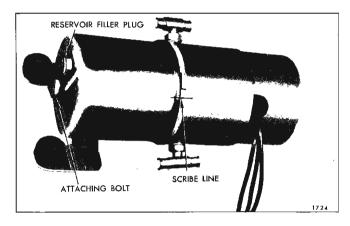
Hydro-Lectric Motor and Pump Assembly
